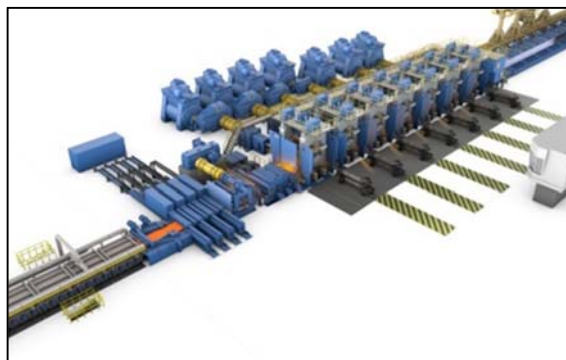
Sketch of the mill layout after revamp with the inductive heater, heat cover hoods and the finishing stand F7
